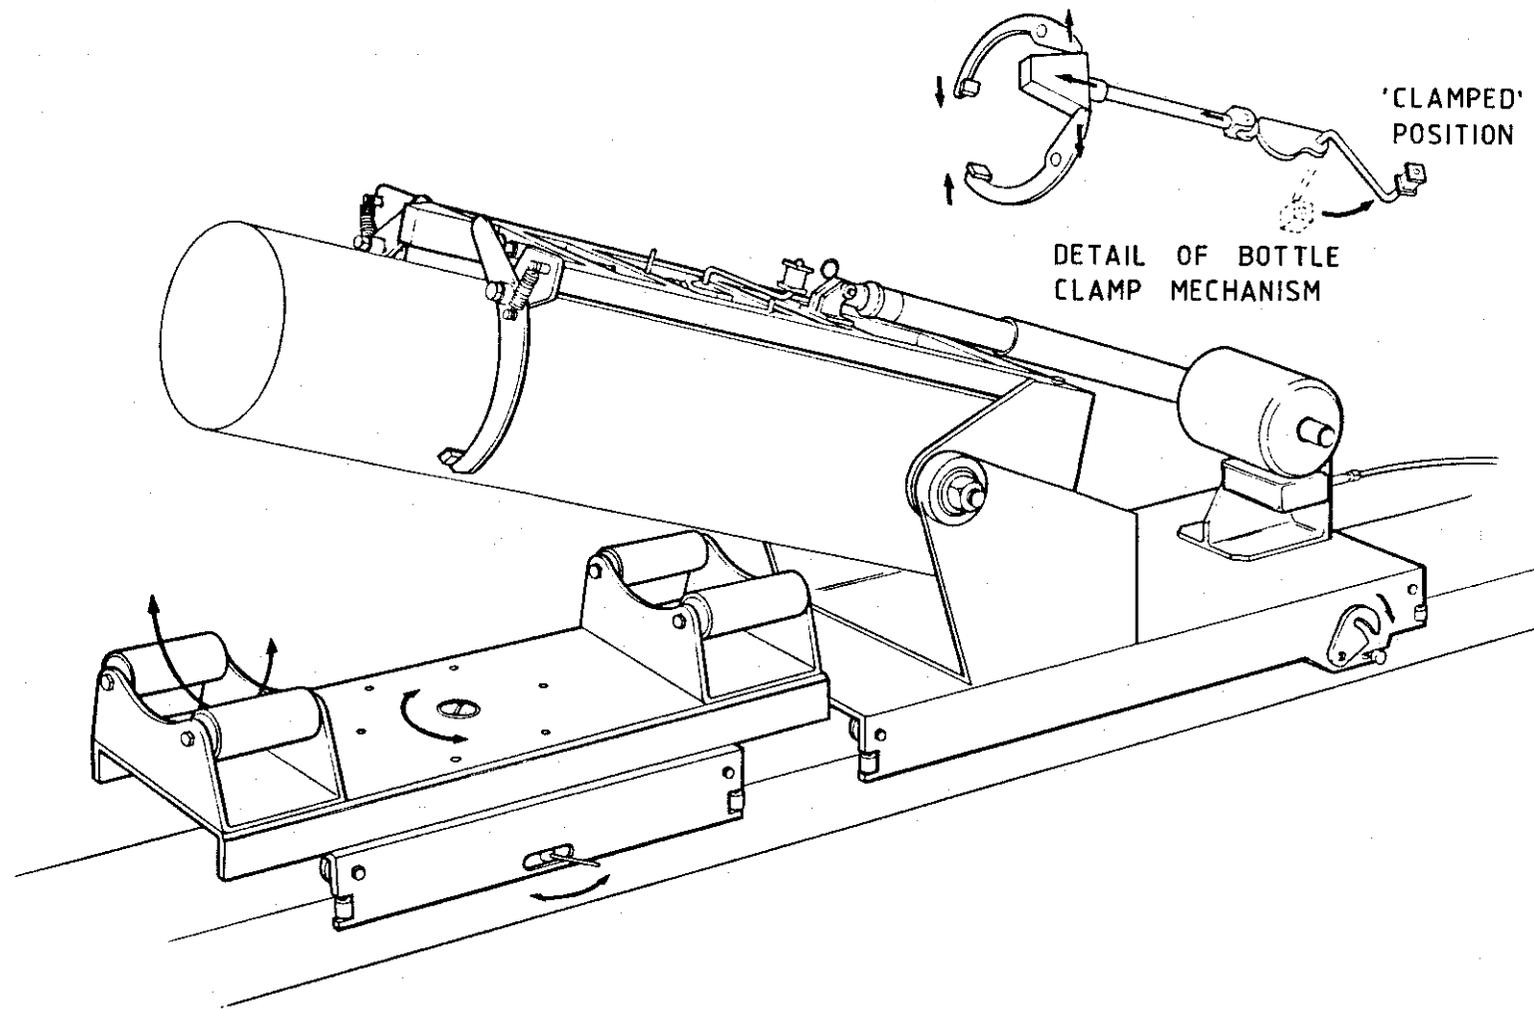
CAGR FUEL ELEMENT TILTING BUCKET AND CRADLE
